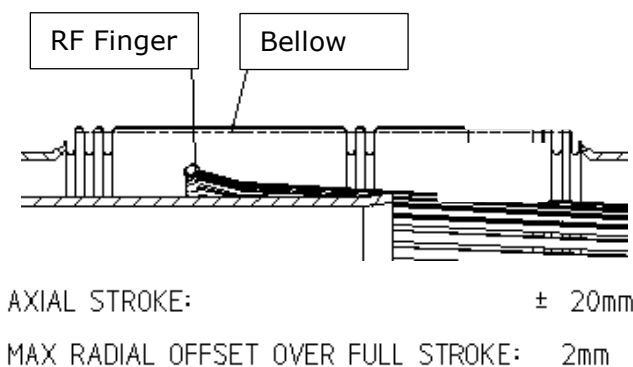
ID80 Vacuum bellow with mechanical tolerances.
